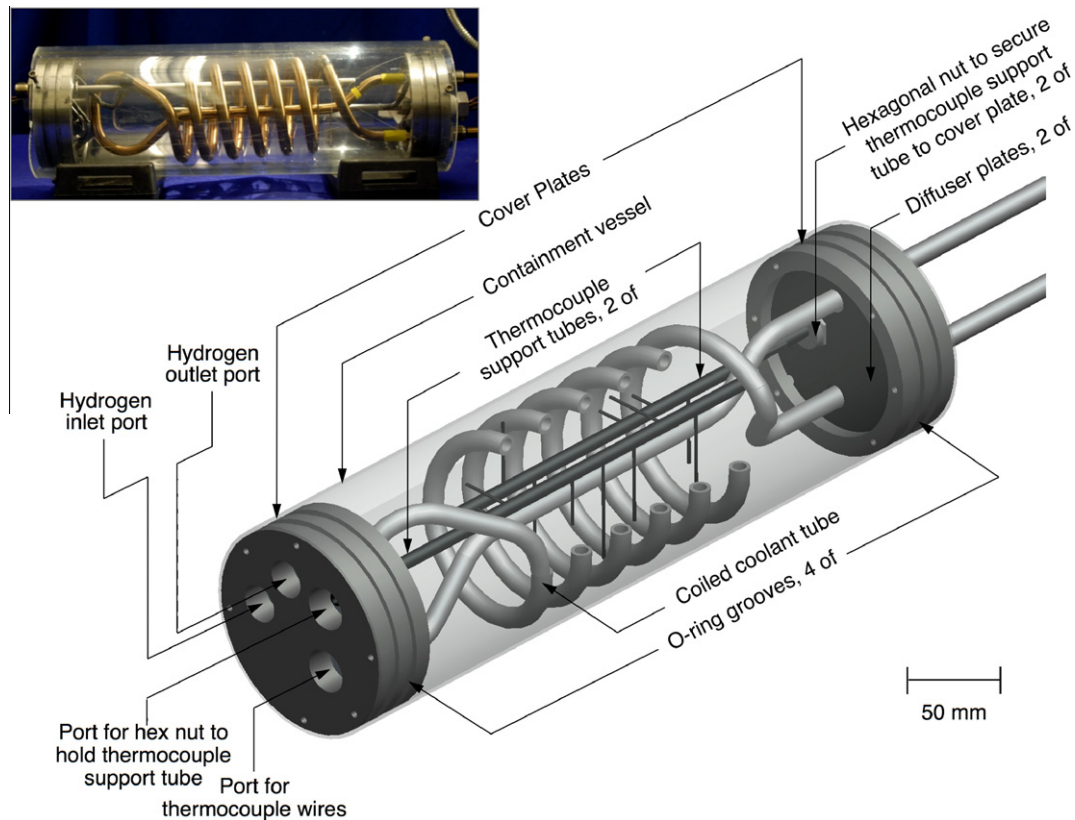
Detailed 3-D rendering of containment vessel/heat exchanger assembly.
